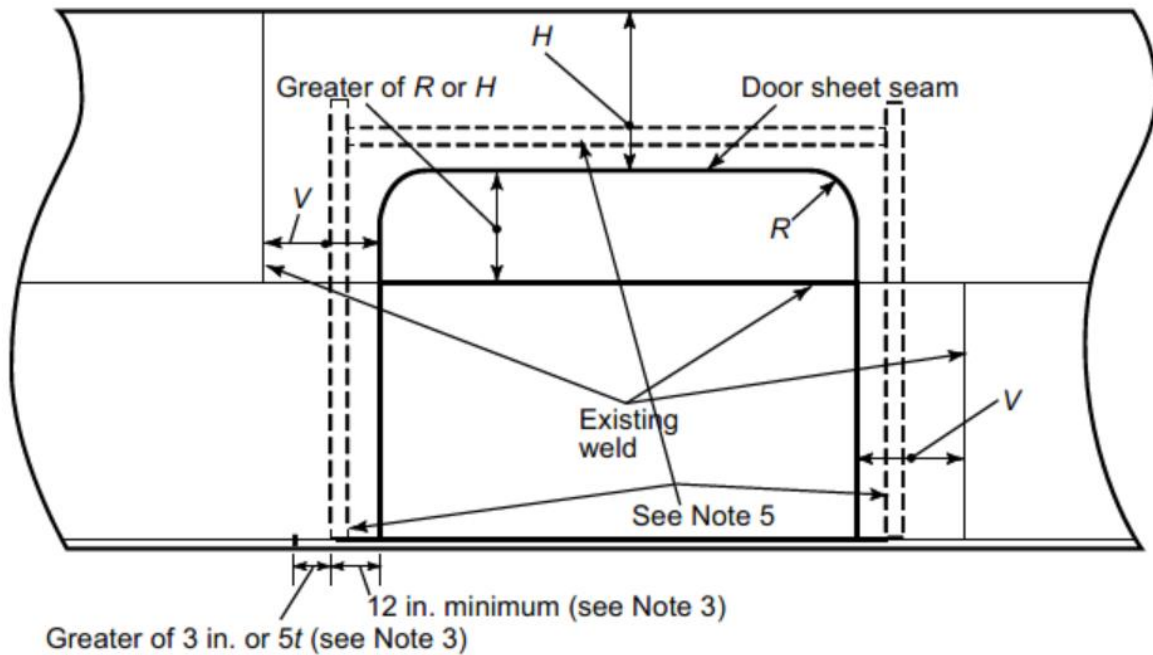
2: Details for Door Sheets in Butt-welded Shell Steam Tank – No Vertical Seam Offset
